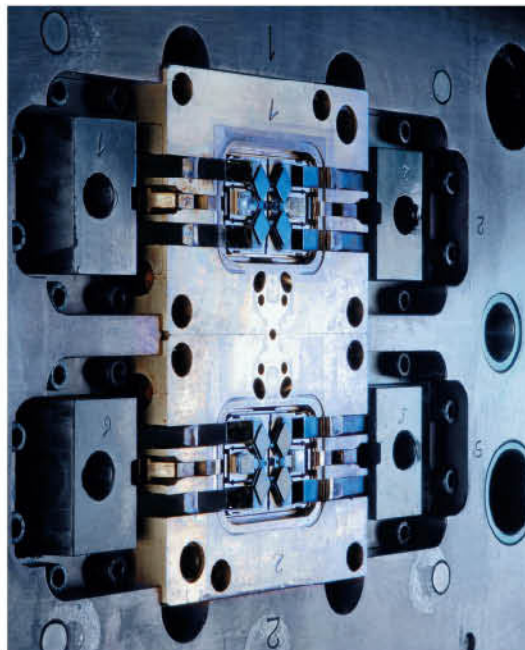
Pre-moulded parts ready for being overmoulded with PBT in the upper cavity of the machine
